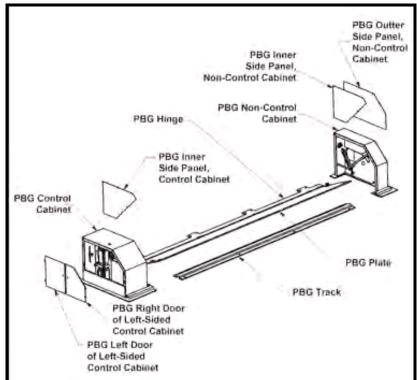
PBG-100 As Installed and Dimensions for Installation Planning
